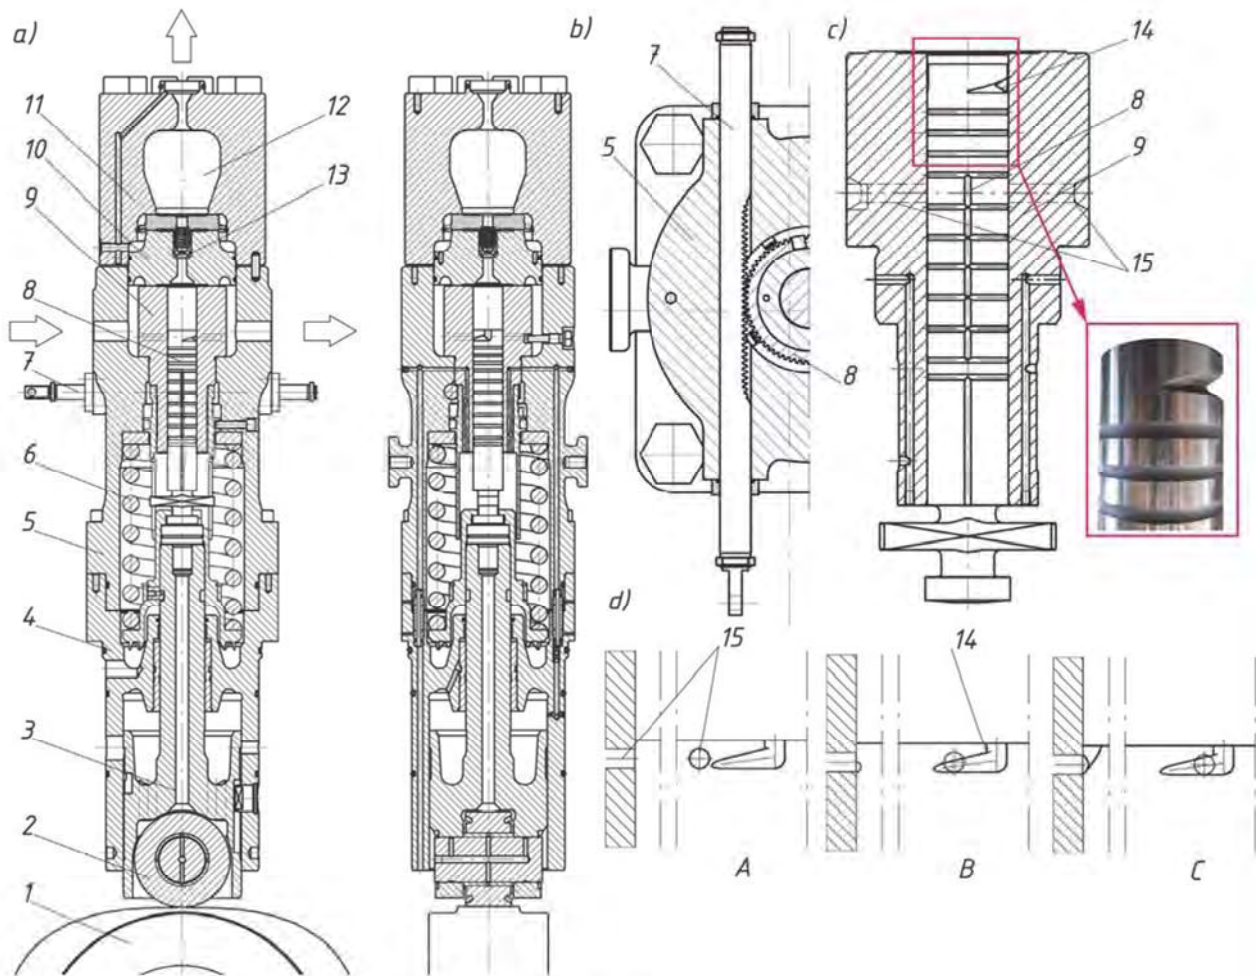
High-pressure section of the RT-flex 96C diesel engine (a), rack-and-pinion plunger rotation mechanism (b), plunger pair (c) and ucl pump section delivery control scheme (d). 1 – drive cam; 2 – pusher roller; 3 – pusher; 4 – pusher housing; 5 – high pressure section housing; 6 – return spring; 7 – rack; 8 – plunger; 9 – plunger bushing; 10 – check valve housing; 11 – cover; 12 – buffer cavity; 13 – check valve; 14 – throttling groove; 15 – filling hole. A – zero supply; B – partial supply; C – full supply (adapted from [51, 52])
